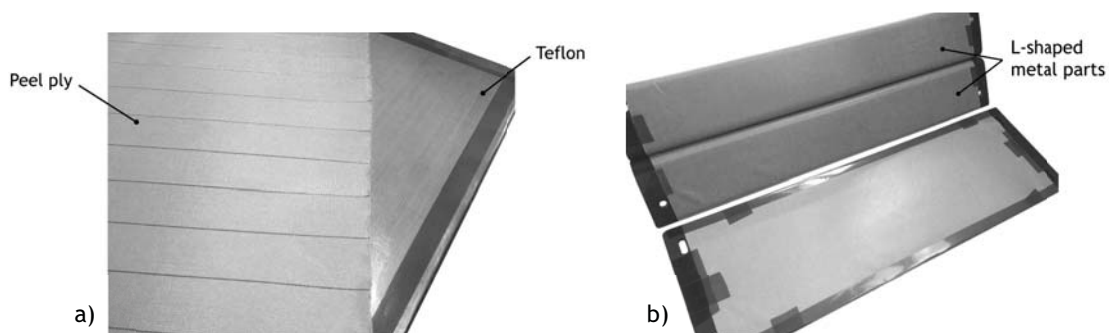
Tooling parts: a) Skin's tool; b) Stiffener's tool.
